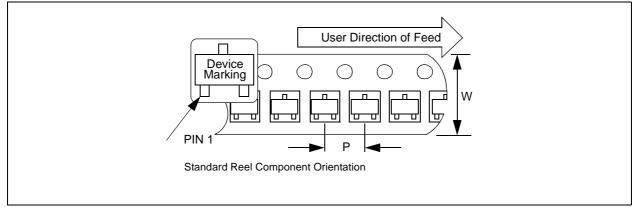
EMBOSSED CARRIER DIMENSIONS (8, 12, 16 AND 24 MM TAPE ONLY)
